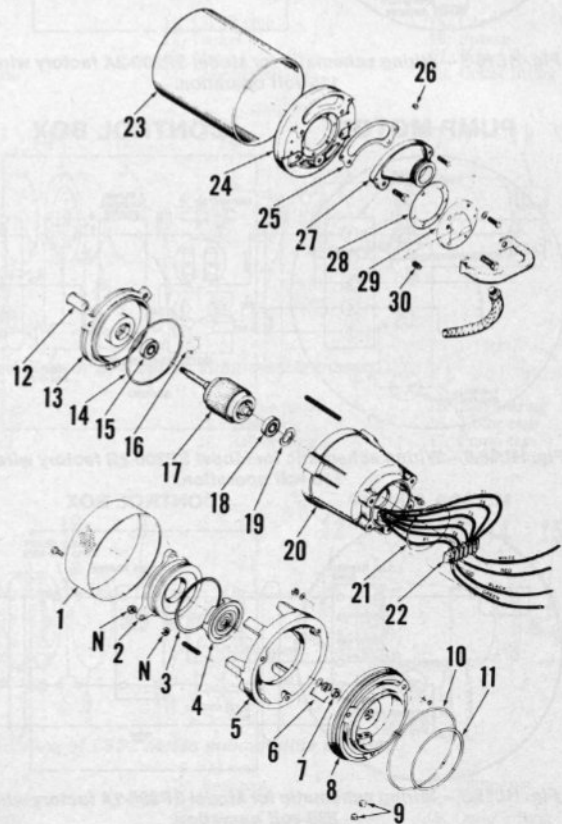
Position pump as shown, remove plugs (9) and fill with oil until oil reaches bottom of plug holes.
